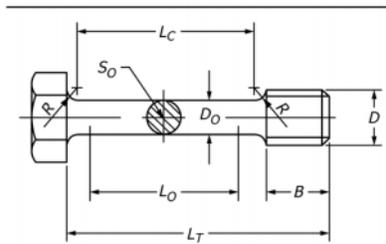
Tension Test Specimen for Bolt with Turned-Down Shank for Inch Bolts
